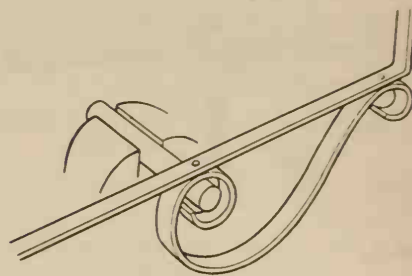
A rod fastened in a vise can be used to rivet scroll work.
